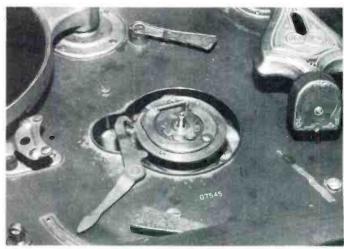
Drive assembly in place on vertical drive spindle. Note the shift lever used to catch and immobilize the planetary reduction frame to attain 331/3 rpm.
